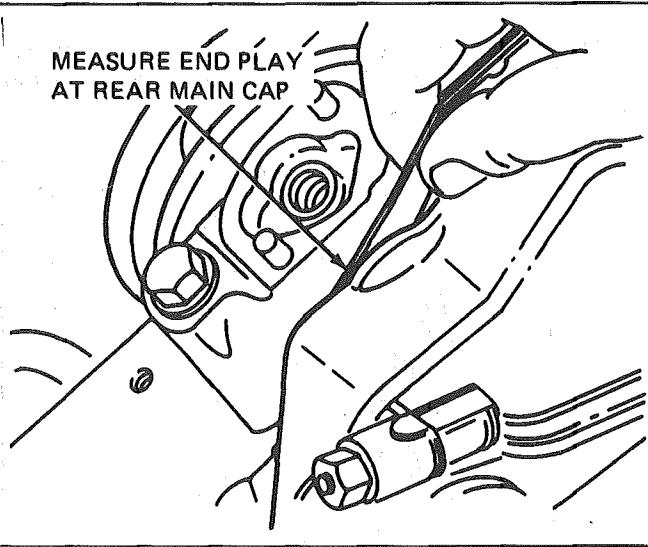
A3-41 Measuring Crankshaft End Play - Typical
